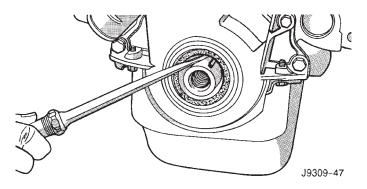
Removal of Front Crankshaft Oil Seal INSTALLATION
